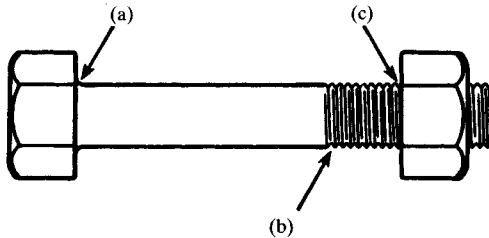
Typical failure points of a bolt. (a) Failure at head fillet; (b) failure at thread runoff; (c) failure at first thread to engage the nut.
